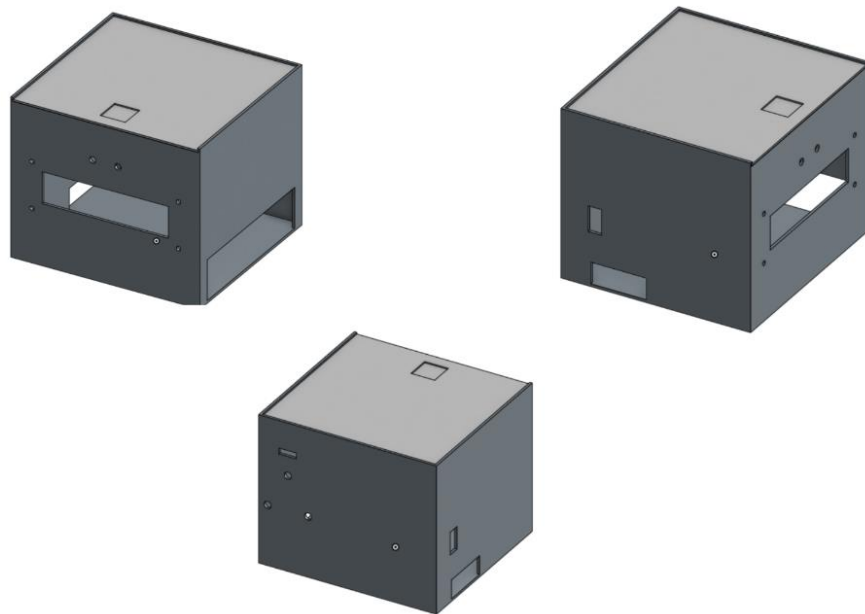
Three isometric views of the housing, holes can be seen for LCD Screen, Sensors, Stepper Motor attachment, rocker switch, and a cutout for AC adapter.
